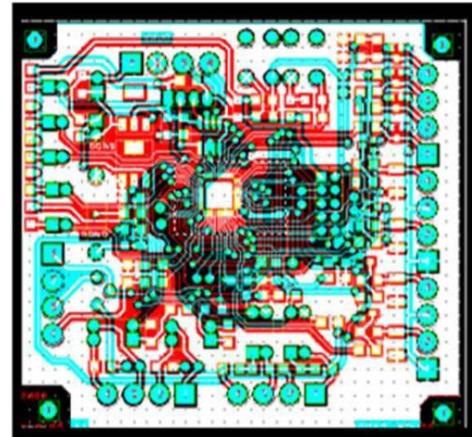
PCB Layout design of the Scanner in OrCAD Layout
